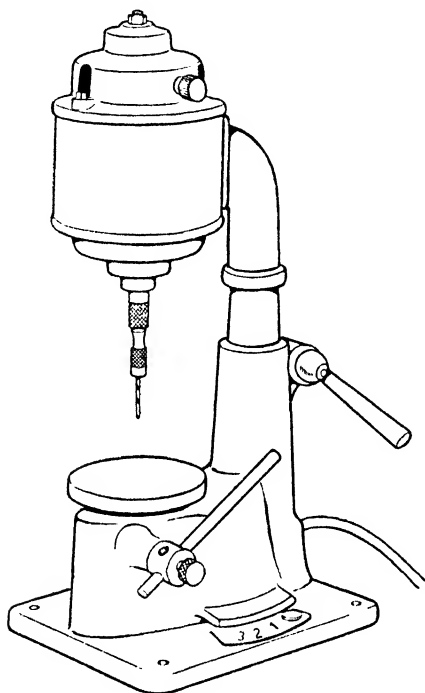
Modern drilling machine with stationary motor and movable plate
